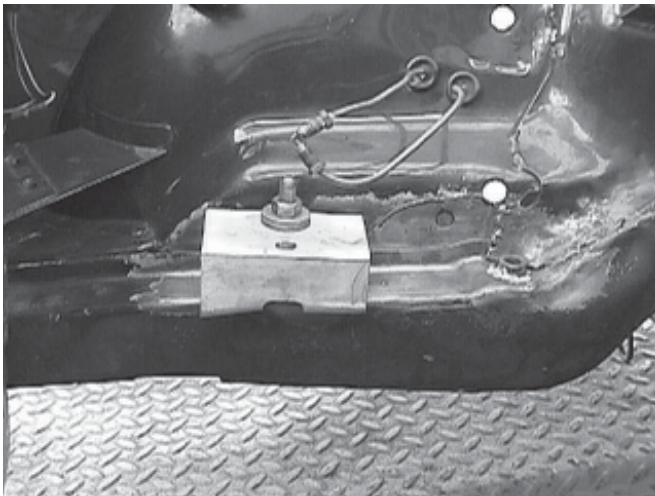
This is a tool I developed to pull the front tube nut back to its original position, without damaging the shape of the frame.
